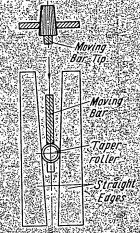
Taper Roller Diameter Measuring Scheme of Model 6AK and Model 6AKB Automatic Machines
